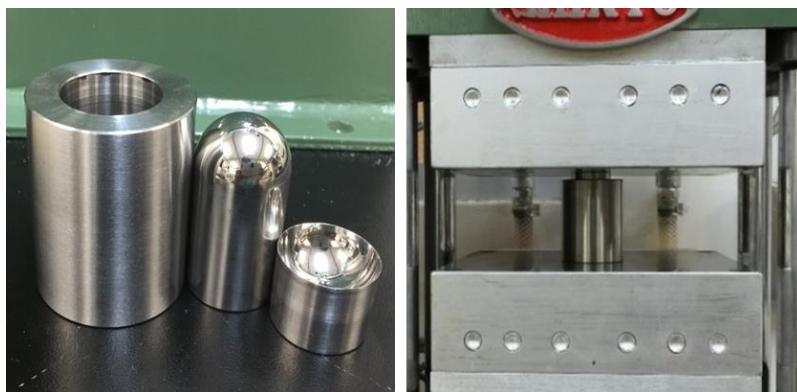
Photograph of stainless steel die for fabricating 3D-curved transparent nanocomposite (left). Photograph of the assembly of the die placed in a hot-press (right).
